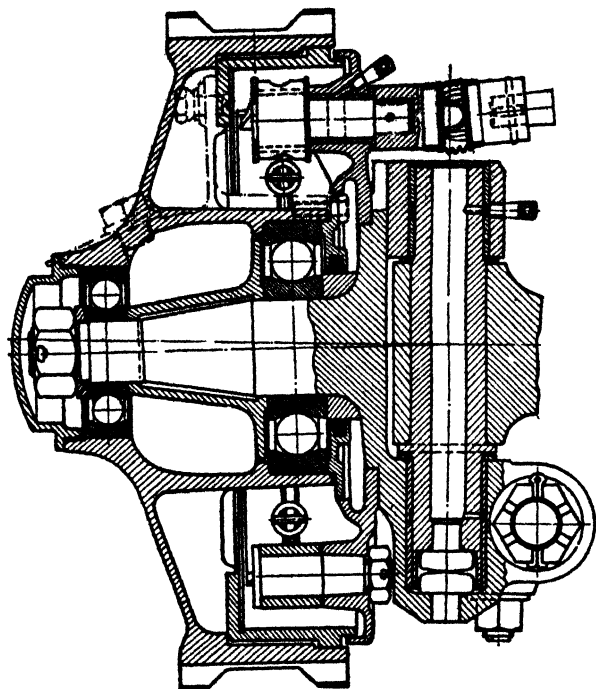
A EUROPEAN DESIGN OF HEAVY FRONT-AXLE END.
